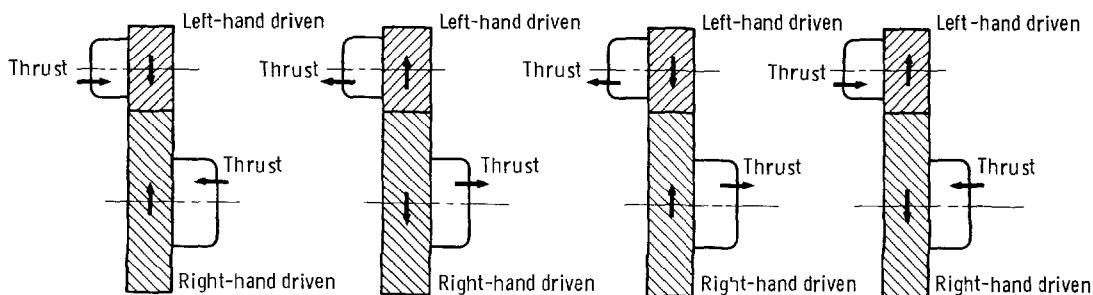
Direction of axial thrust load for helical gears on parallel shafts.
